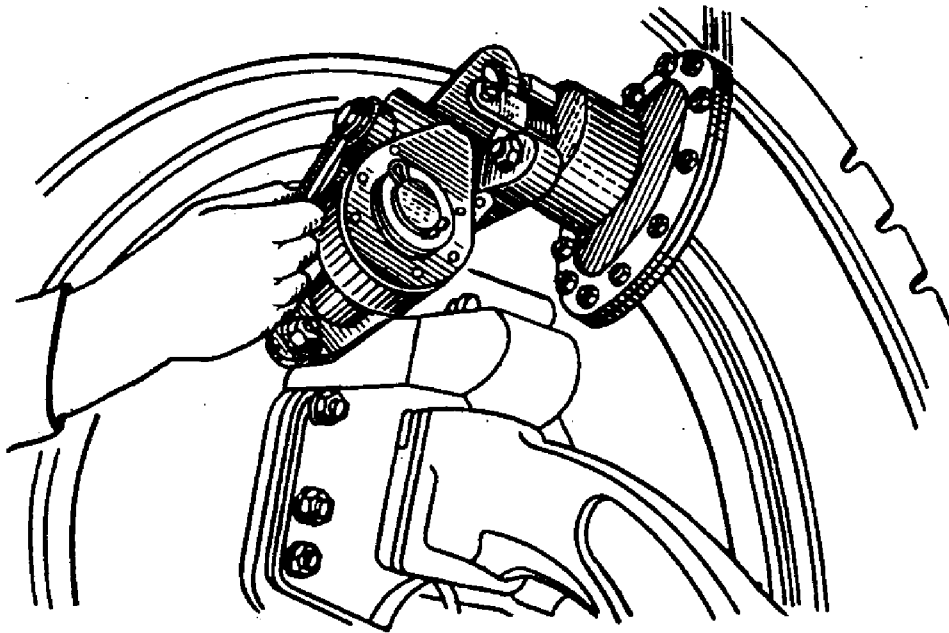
ADJUSTING WHEEL BRAKE BY WORM OF BRAKE CHAMBER
